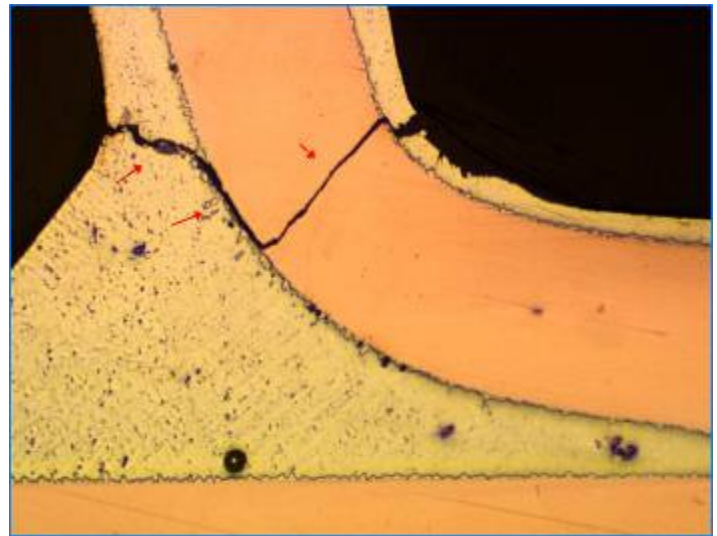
cross section, SN65, U20, right lead and solder crack, 200x
